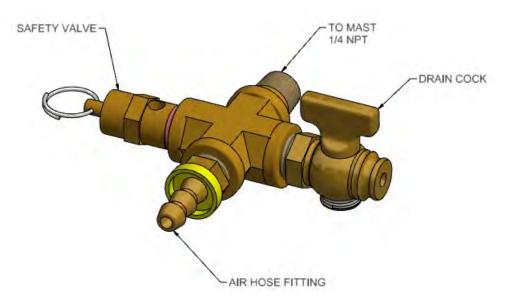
Mast Air Inlet Hardware Kit Assembly Detail
